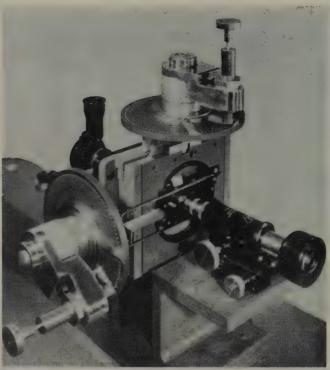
The image holder end of step and repeat camera showing both indexing heads, microscopes and plate holder.
